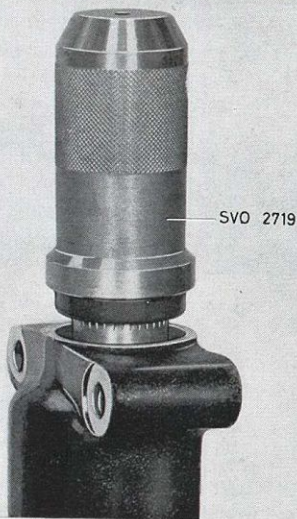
Fitting sealing ring, pitman arm shaft
